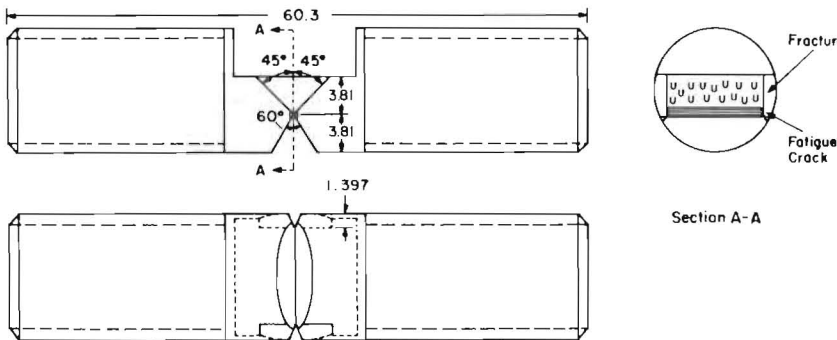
Second machining (after fatigue precracking) for the symmetric specimens.
